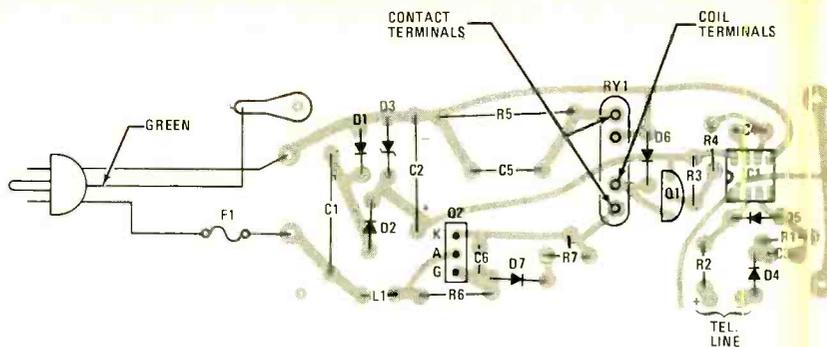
COMPONENT PLACEMENT diagram for the ring detector PC board.
